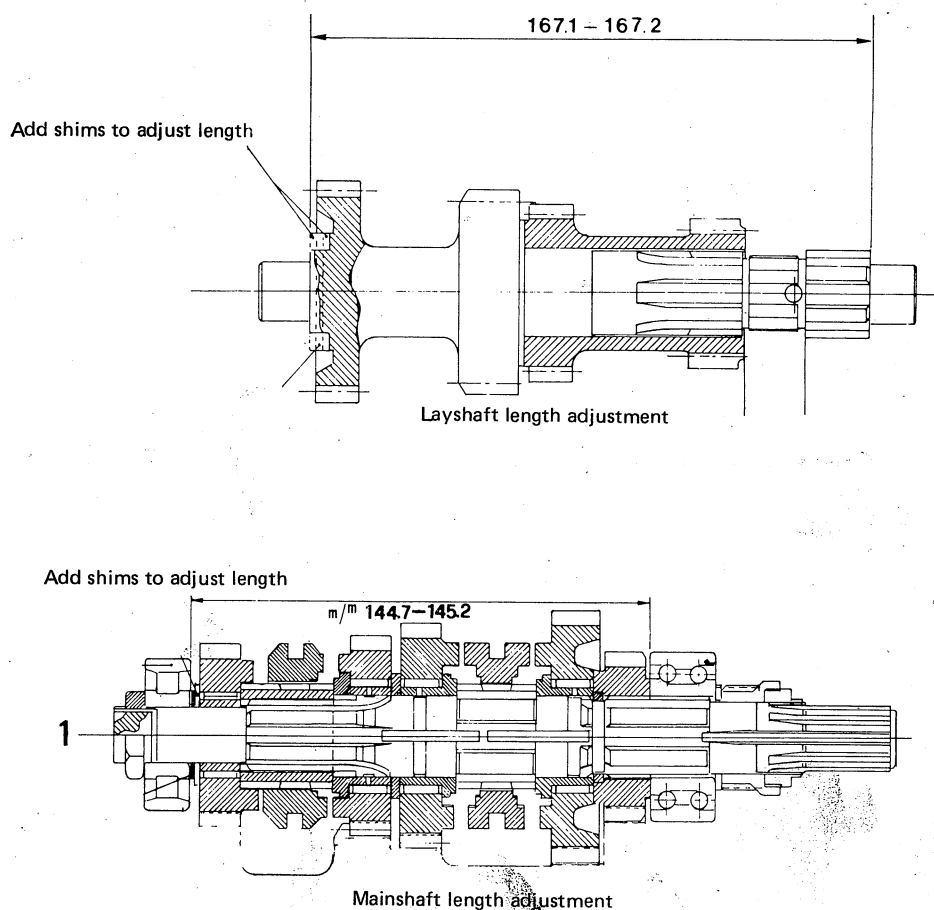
Layshaft adjusted length and mainshaft adjusted length
